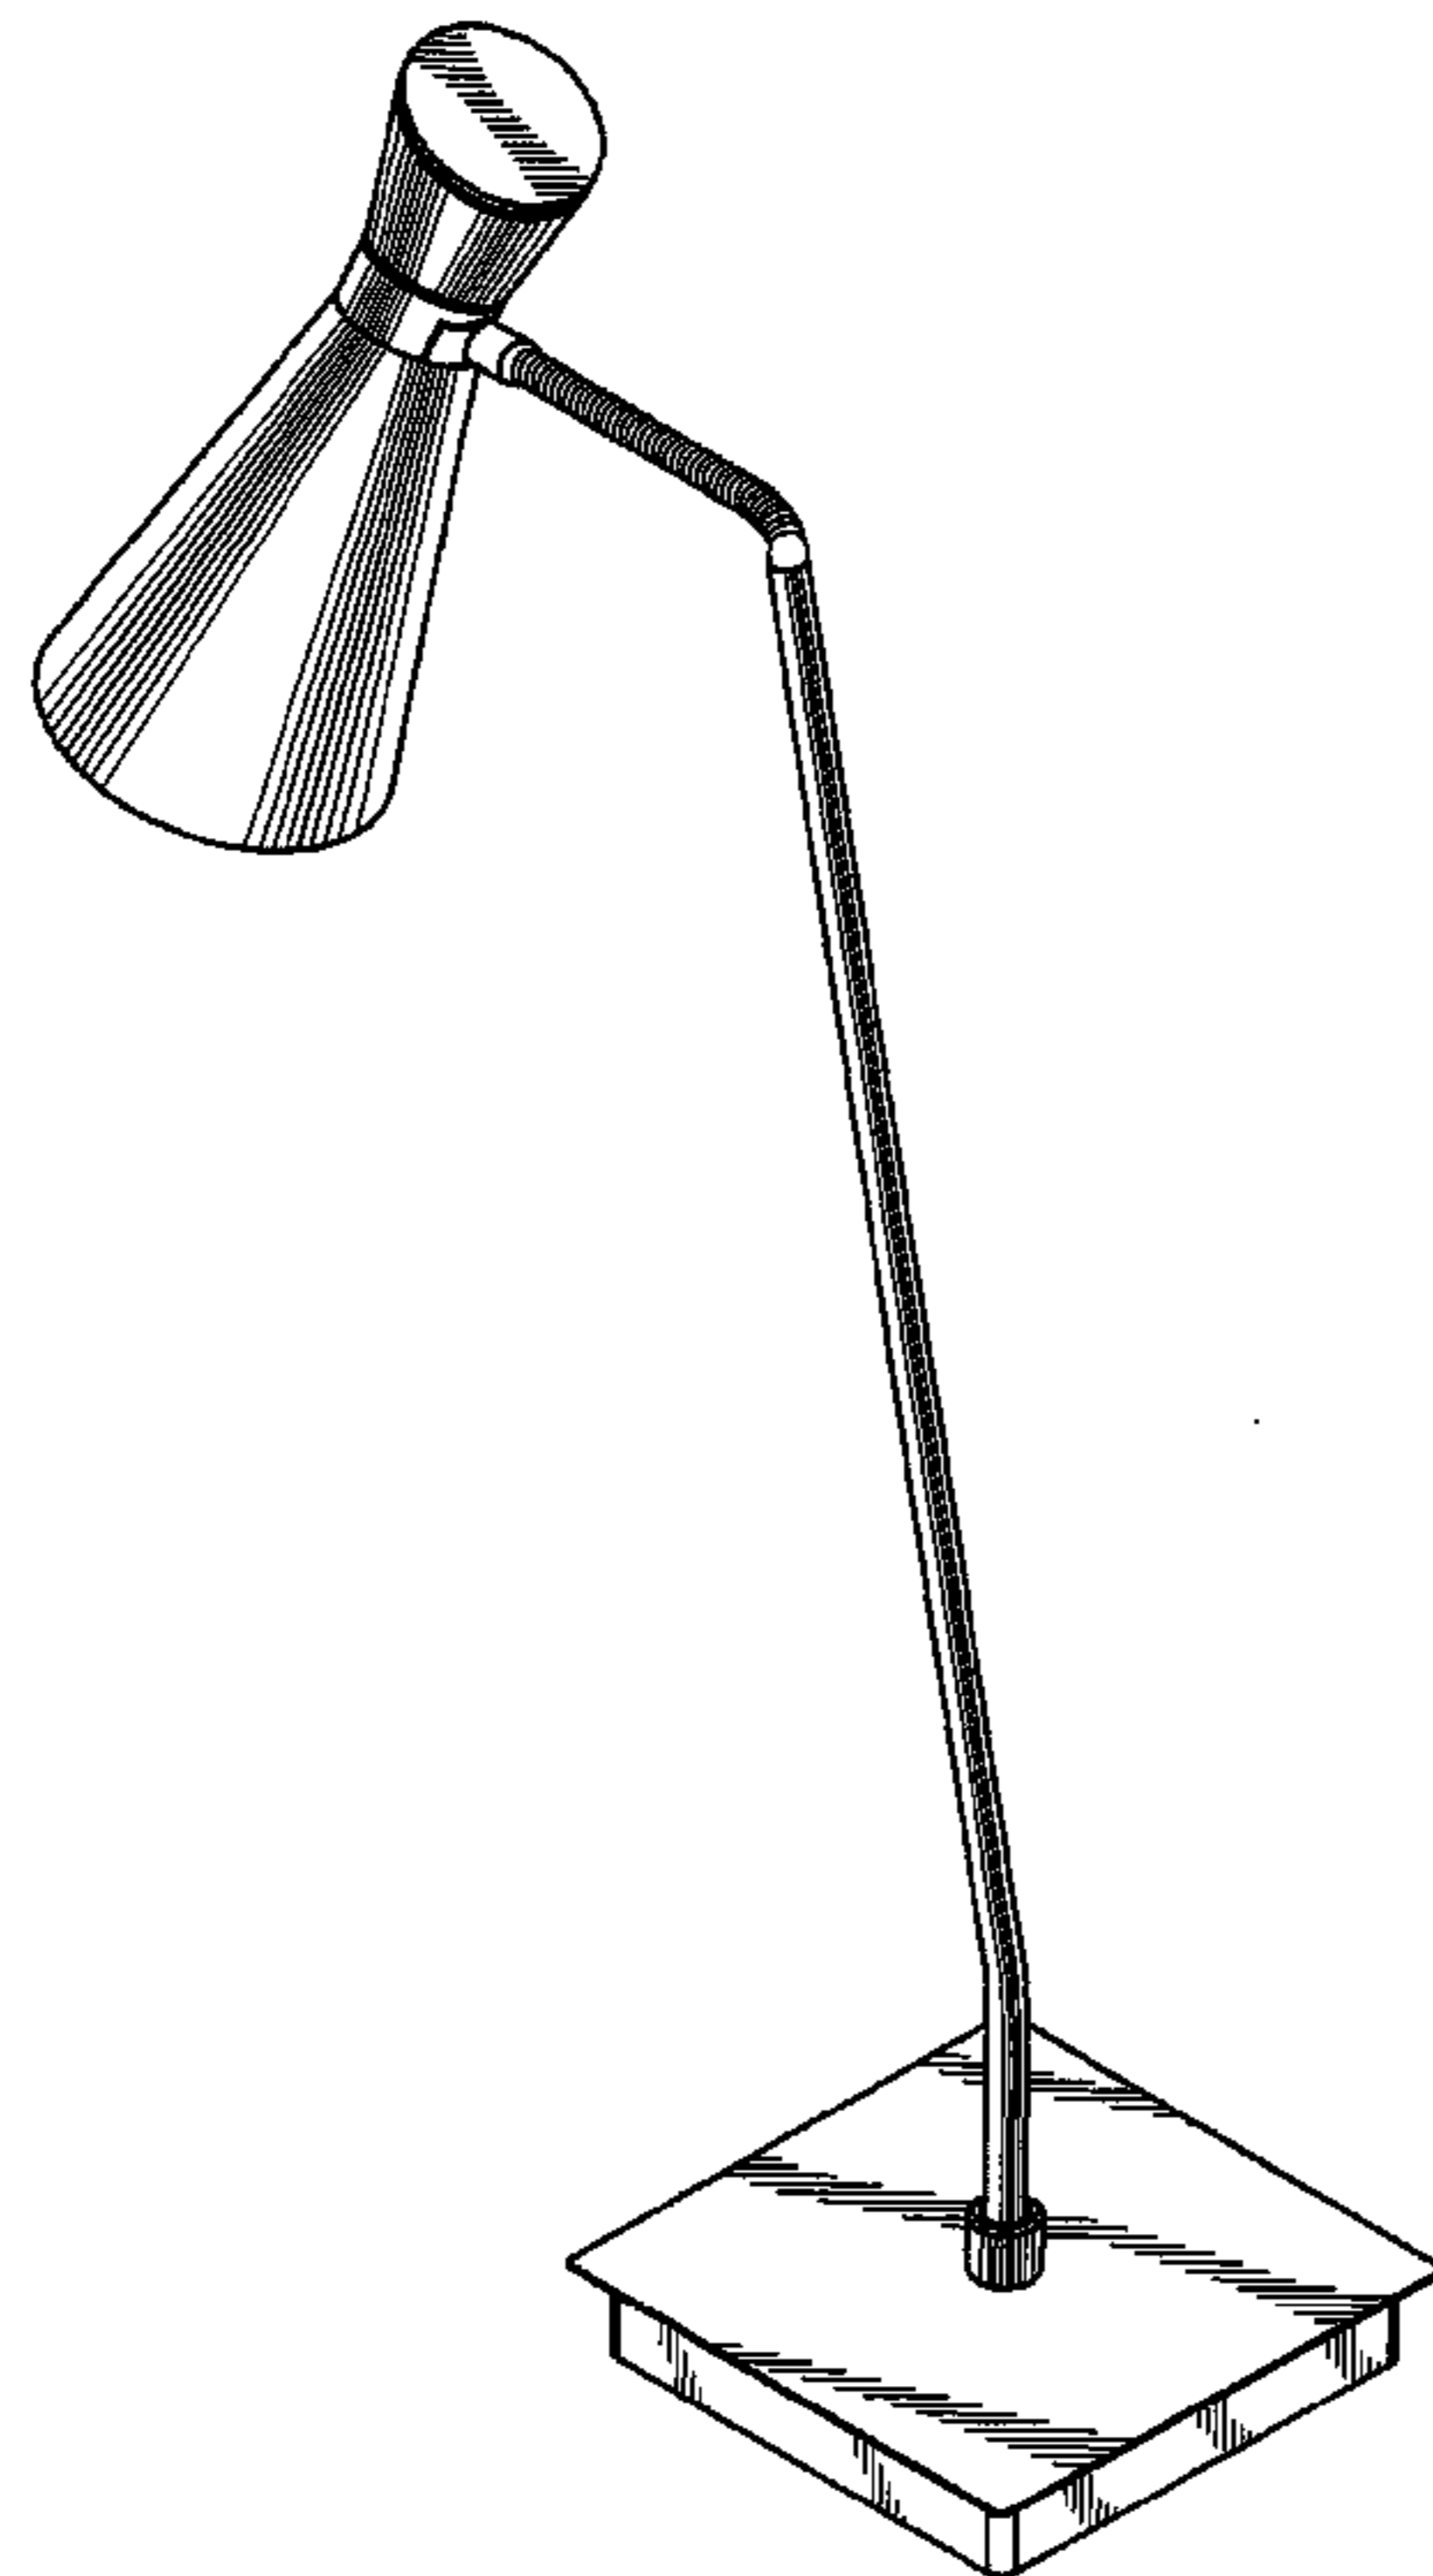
is a front elevation view of the light fixture in accordance with my design;
